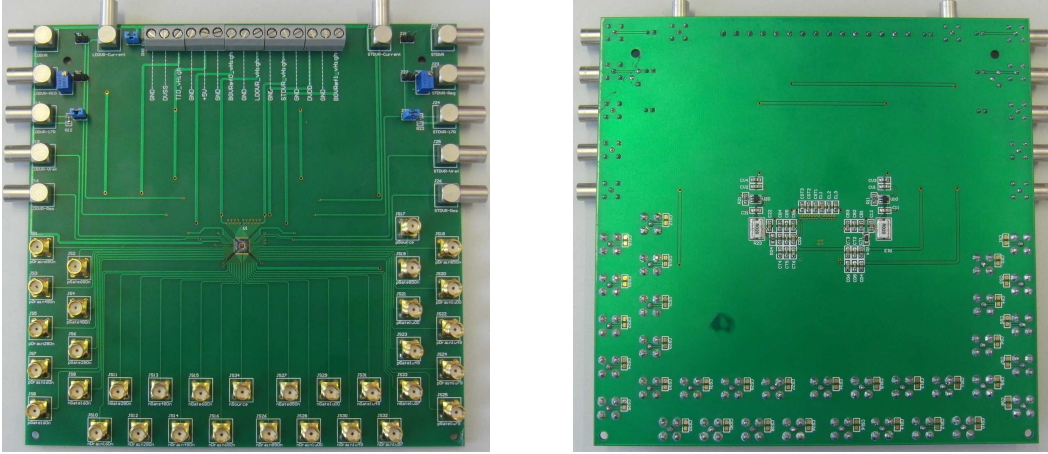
The PCB with the prototype chip mounted in the middle.
